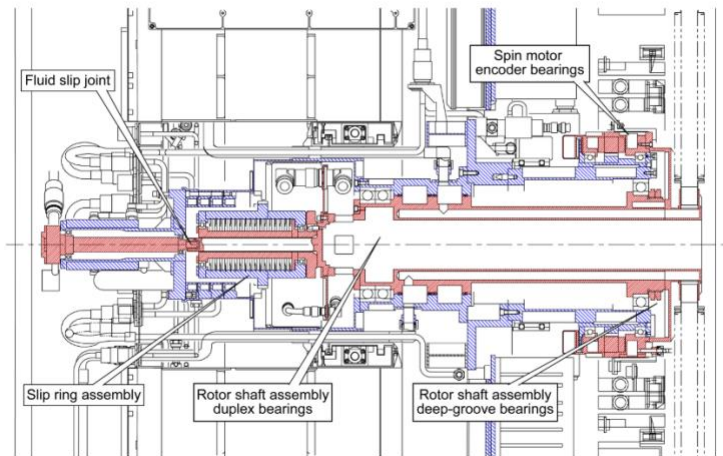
ISS Centrifuge Rotor Slip Ring & Bearing Assembly [39]
